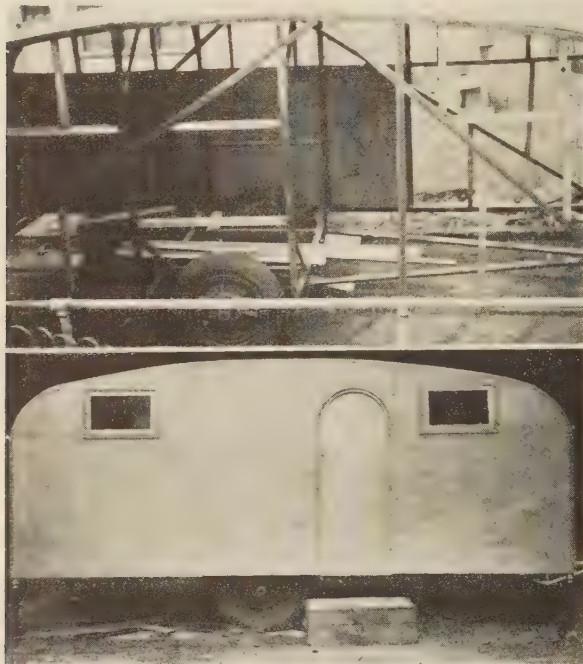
WELDED AUTOMOBILE TRAILER
